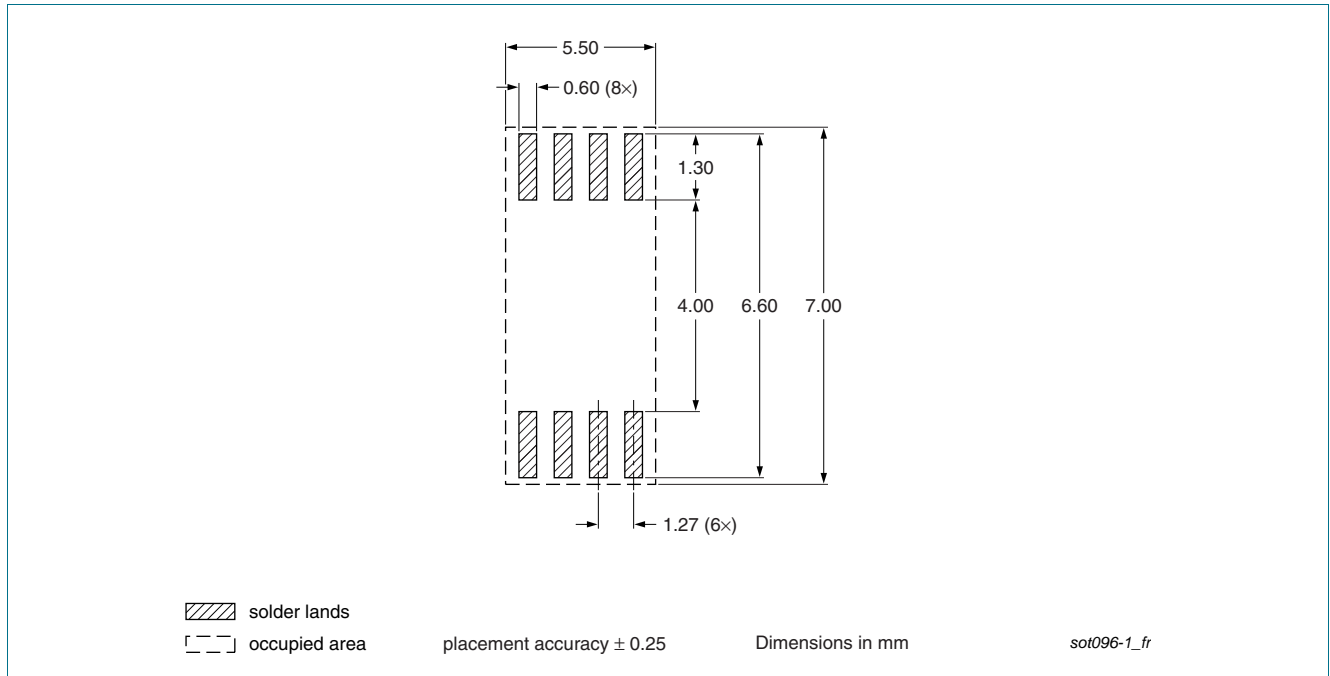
Reflow soldering footprint for SOT96-1 (SO8)
